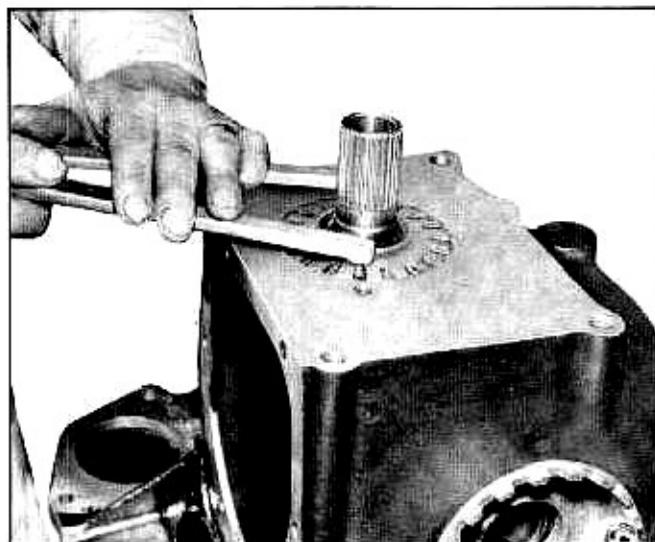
Tightening Pinion Bearing Adjusting Sleeve
